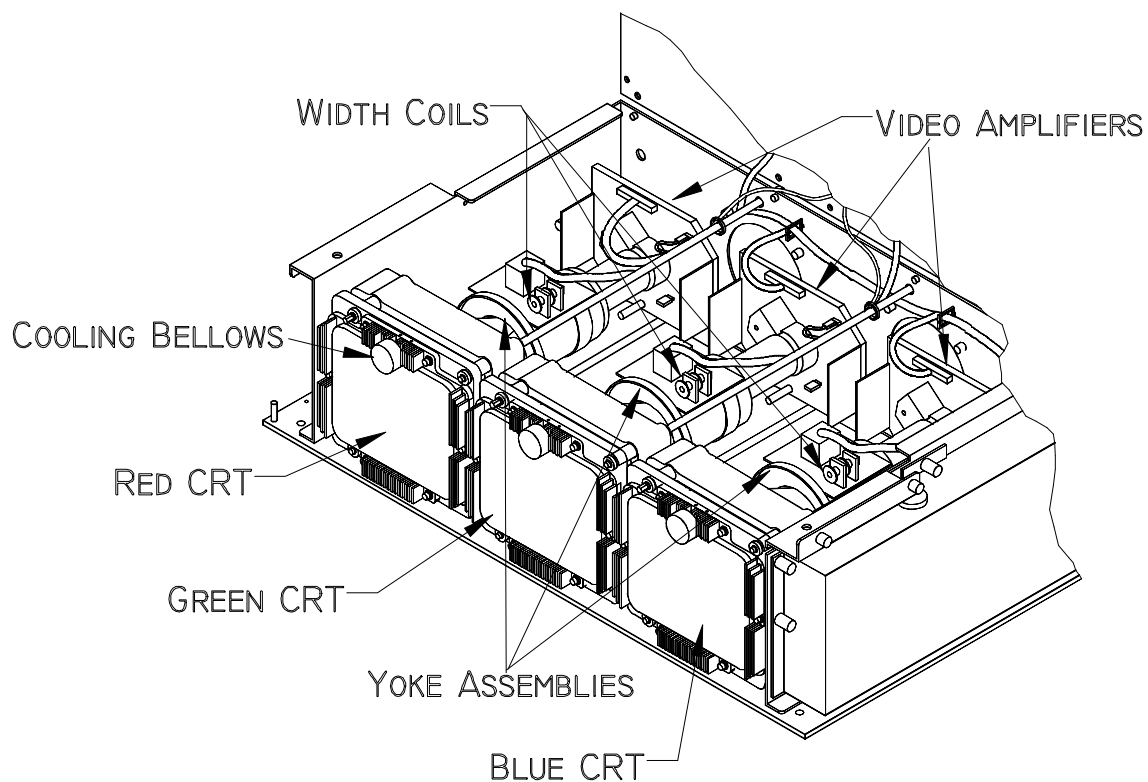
View of the CRT Assembly with System Power Supply removed showing deflection yokes and width coils.
